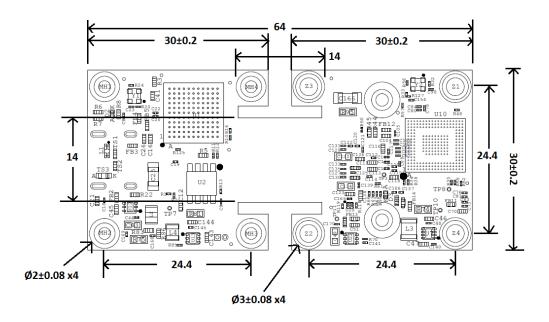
Top View of See3CAM_CU27 Mechanical Dimensions
